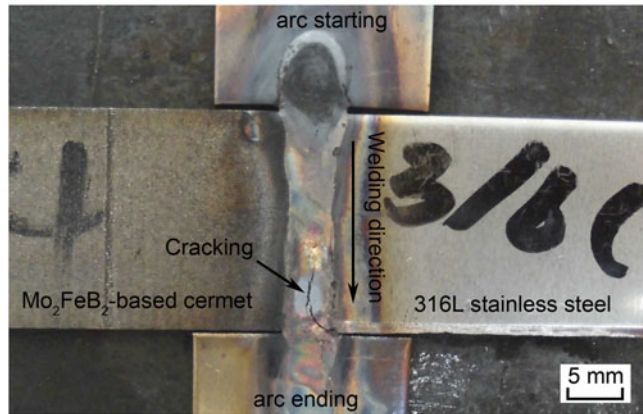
Macrograph of the weld joint after PRRC test.
